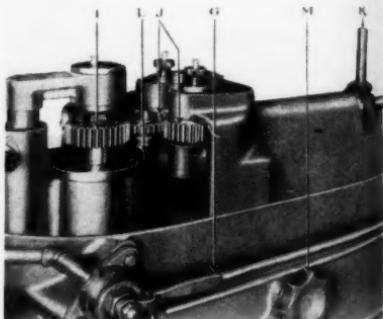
Burnishing Rolls on No. 2 Machine With Gear in Place.
